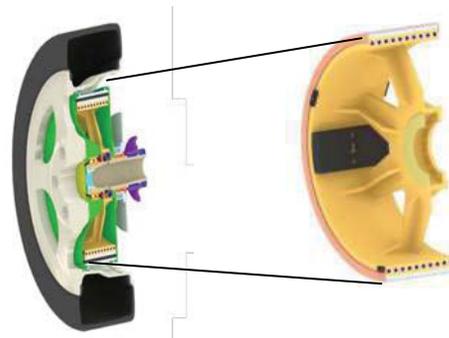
Wheel hub motor design (left: complete Wheel with motor; right: stator of the wheel hub motor), [3].
